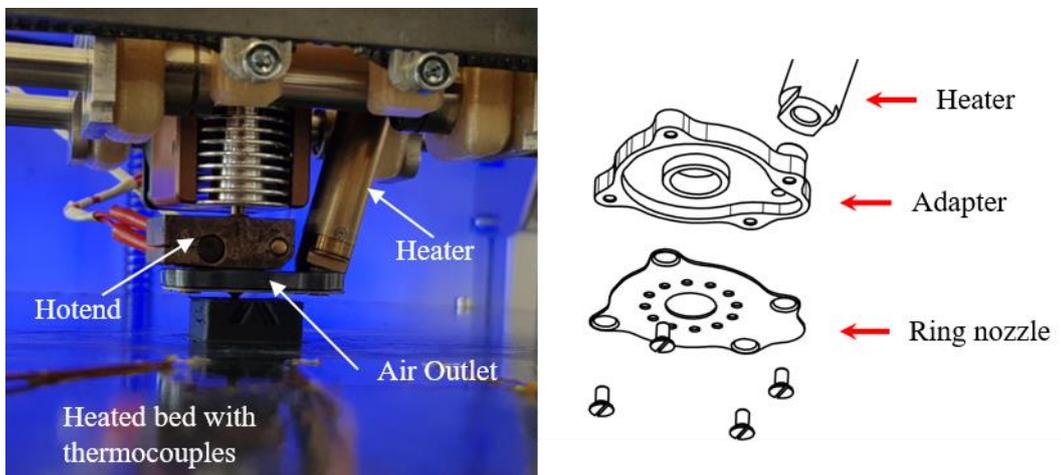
Modified printed for the concept study. Left: Print head assembly; right: Ring nozzle for symmetric air outlet.
